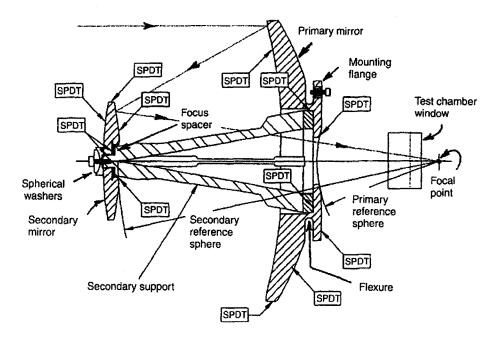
Optomechanical schematic of an all aluminum telescope with optical surfaces, mechanical interfaces, and alignment reference surfaces SPDT machined for simple assembly without adjustment. (Adapted from Erickson et al.¹⁷)
